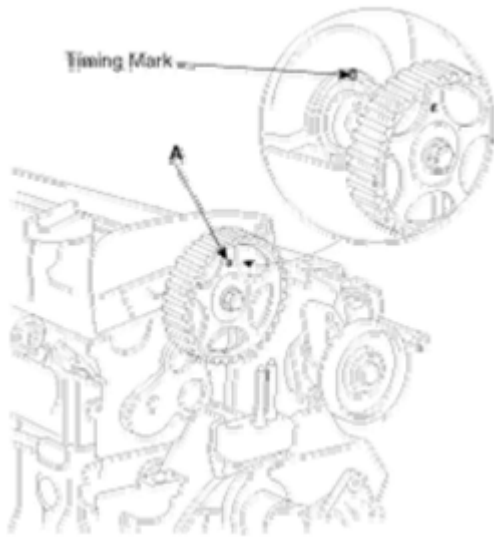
Checking Alignment Of Camshaft Timing Pulley Hole & Timing Mark Of Bearing Cap
